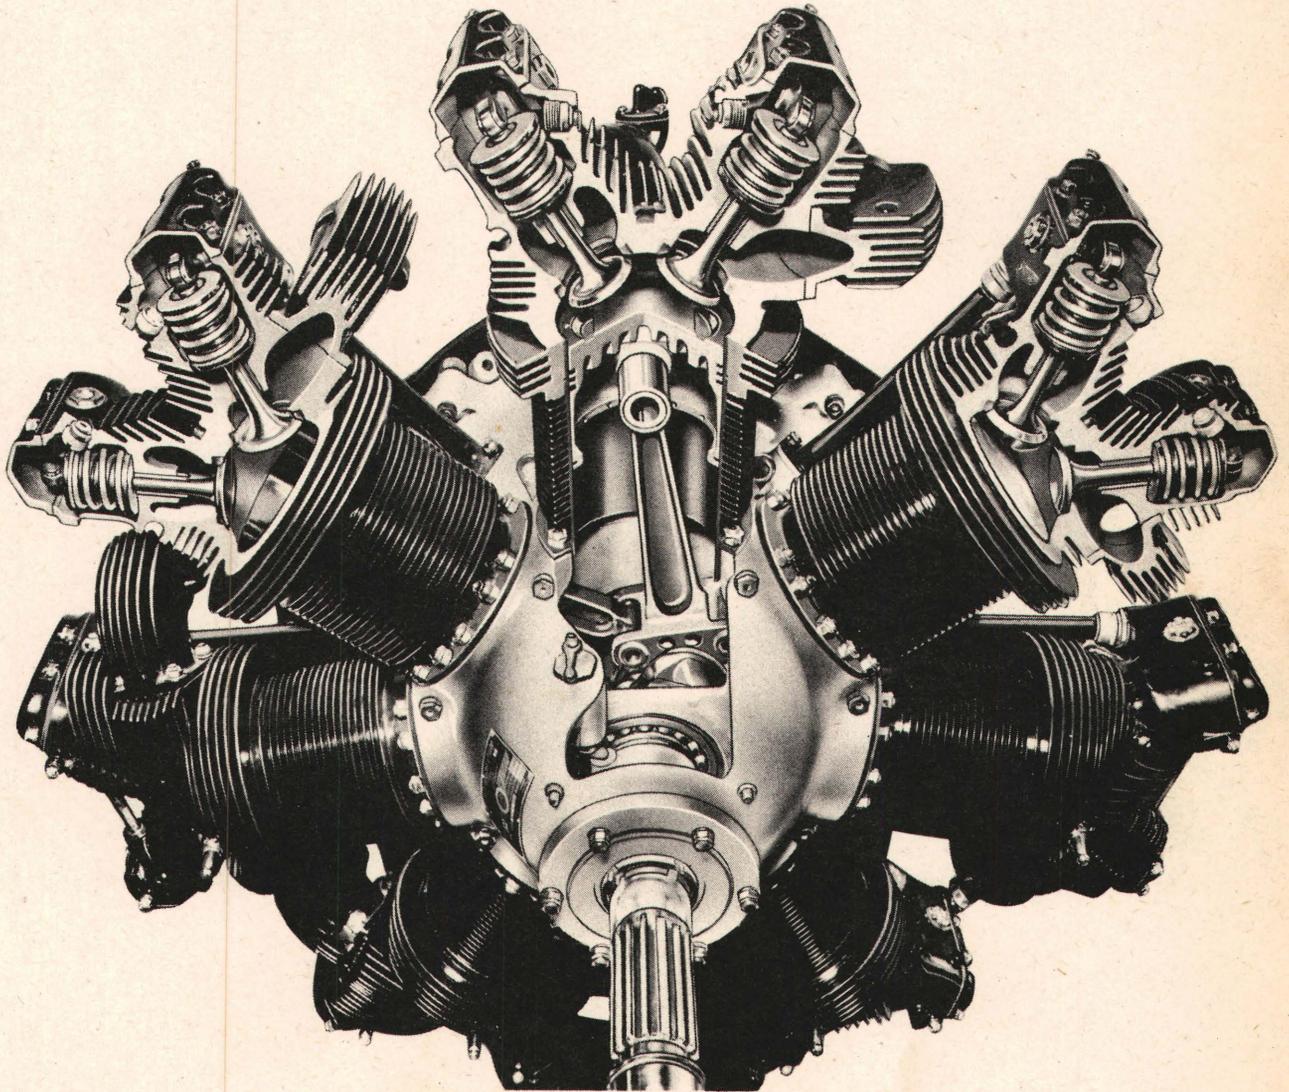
Three-Quarter Top Front Cutaway View of R-670-4, -5, -6 and -11A Engines
